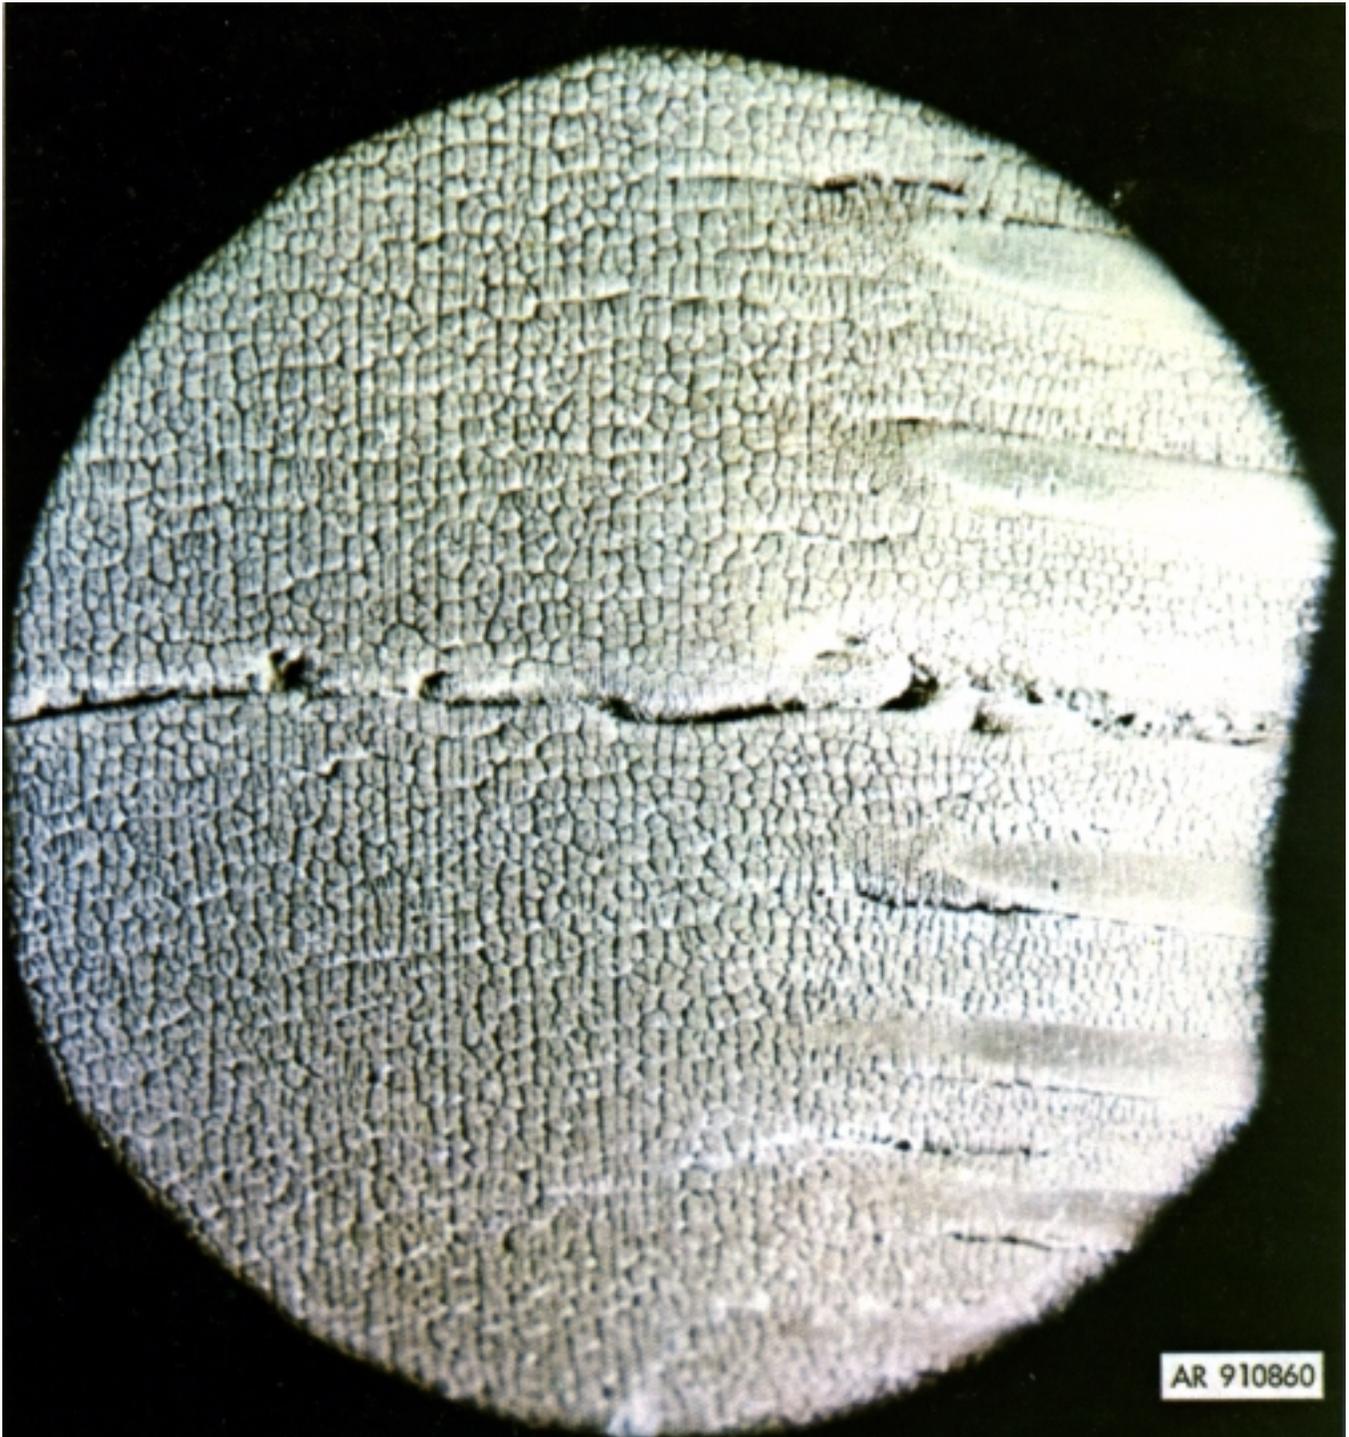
View of crack due to fatigue after 15,000 rounds extending from forward of origin of rifling rearward into chamber. (1 of 2)
